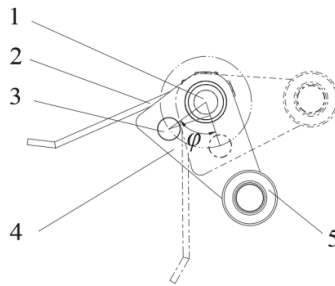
A schematic diagram of the rotation of the decapping area of the hook tooth assembly: 1. Hook tooth mounting shaft; 2. Hook tooth; 3. Short shaft; 4. Side guide plate; 5. Roller.
